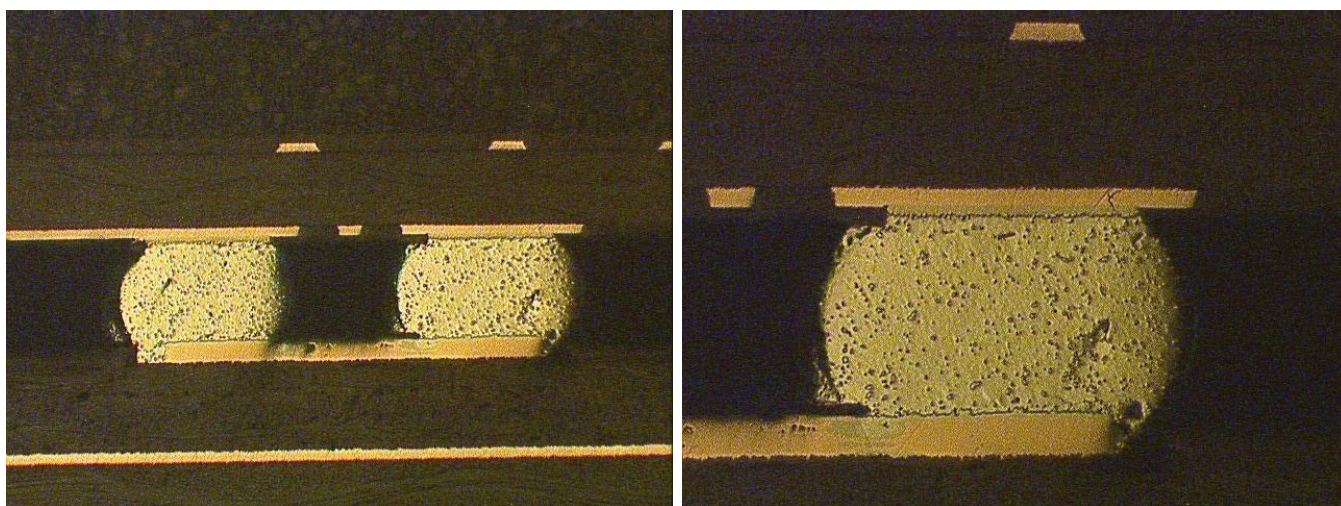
Reworked CSP-100 Solder Joints, Board 126, Component U60, Initially SnPb/SnPb, 1 rework SnPb/SAC105, DNF
